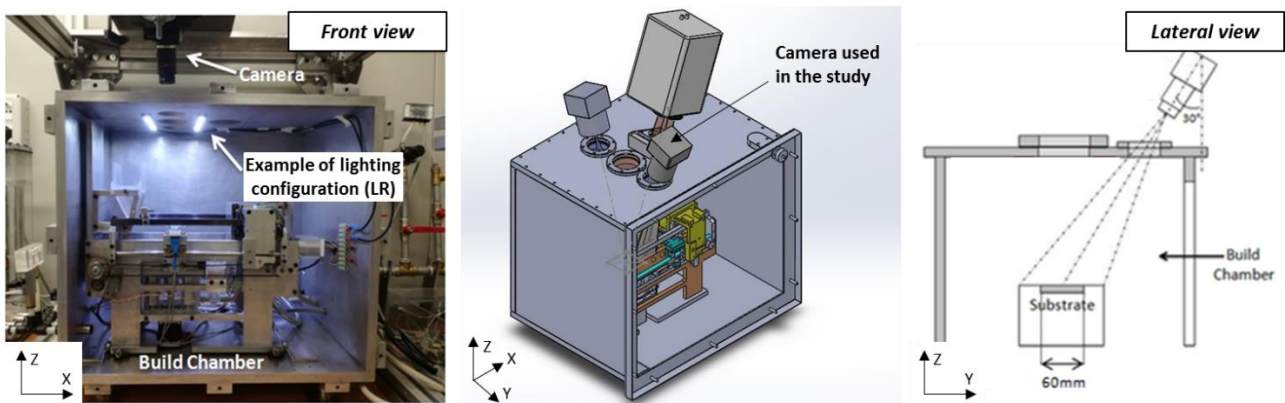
Front view (left panel), 3D view (central panel) and later view (right panel) of the PLBF prototype system used for the experimental activity
